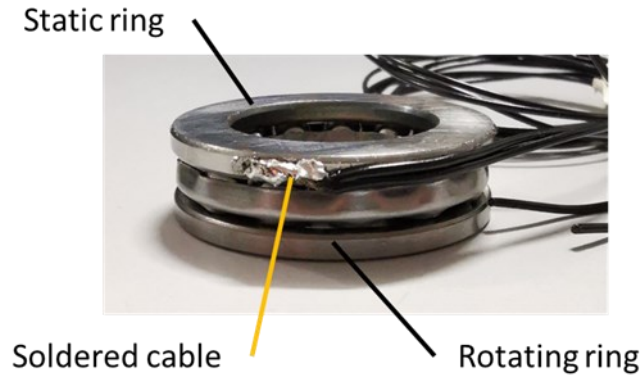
ECR wire tin soldered to the static ring of a 51104 bearing.
